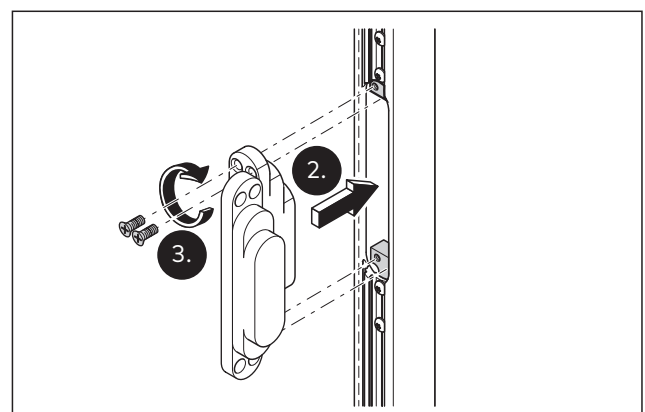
Connect the TECTUS door hinge to the mounting brackets
